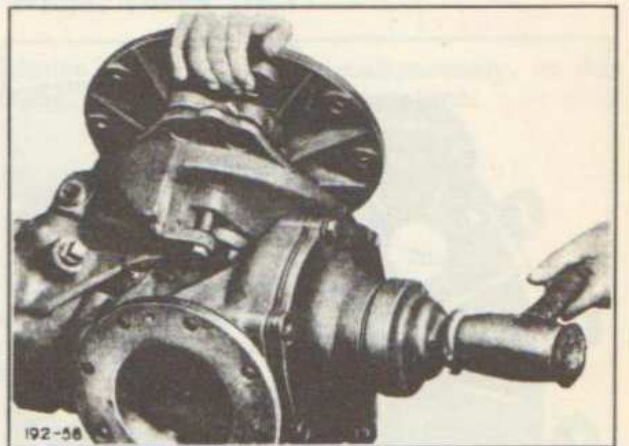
Placing 2nd Reduction Bevel Gear Sub-assembly in Housing
